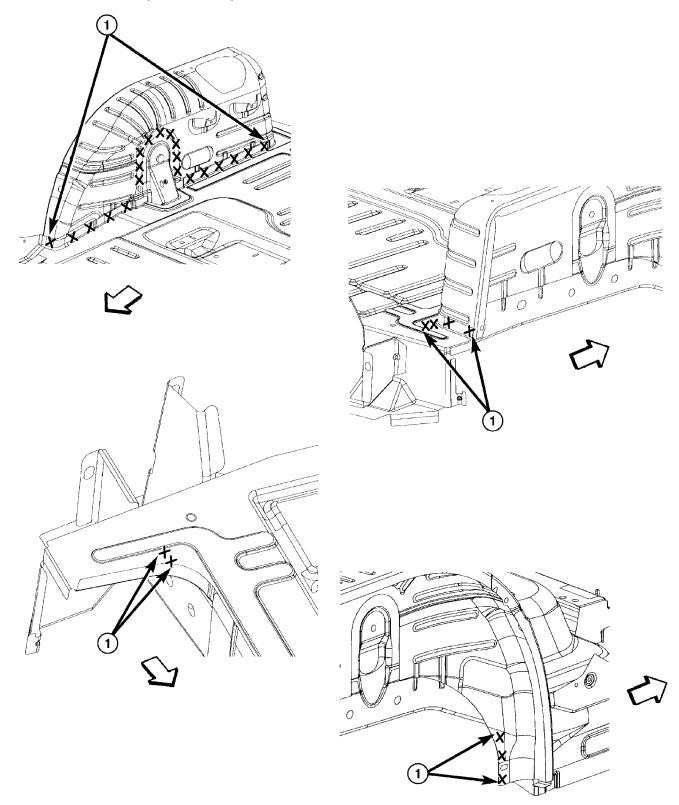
RIGHT INNER WHEELHOUSE TO REAR FLOOR PAN AND SHOCK MOUNT
